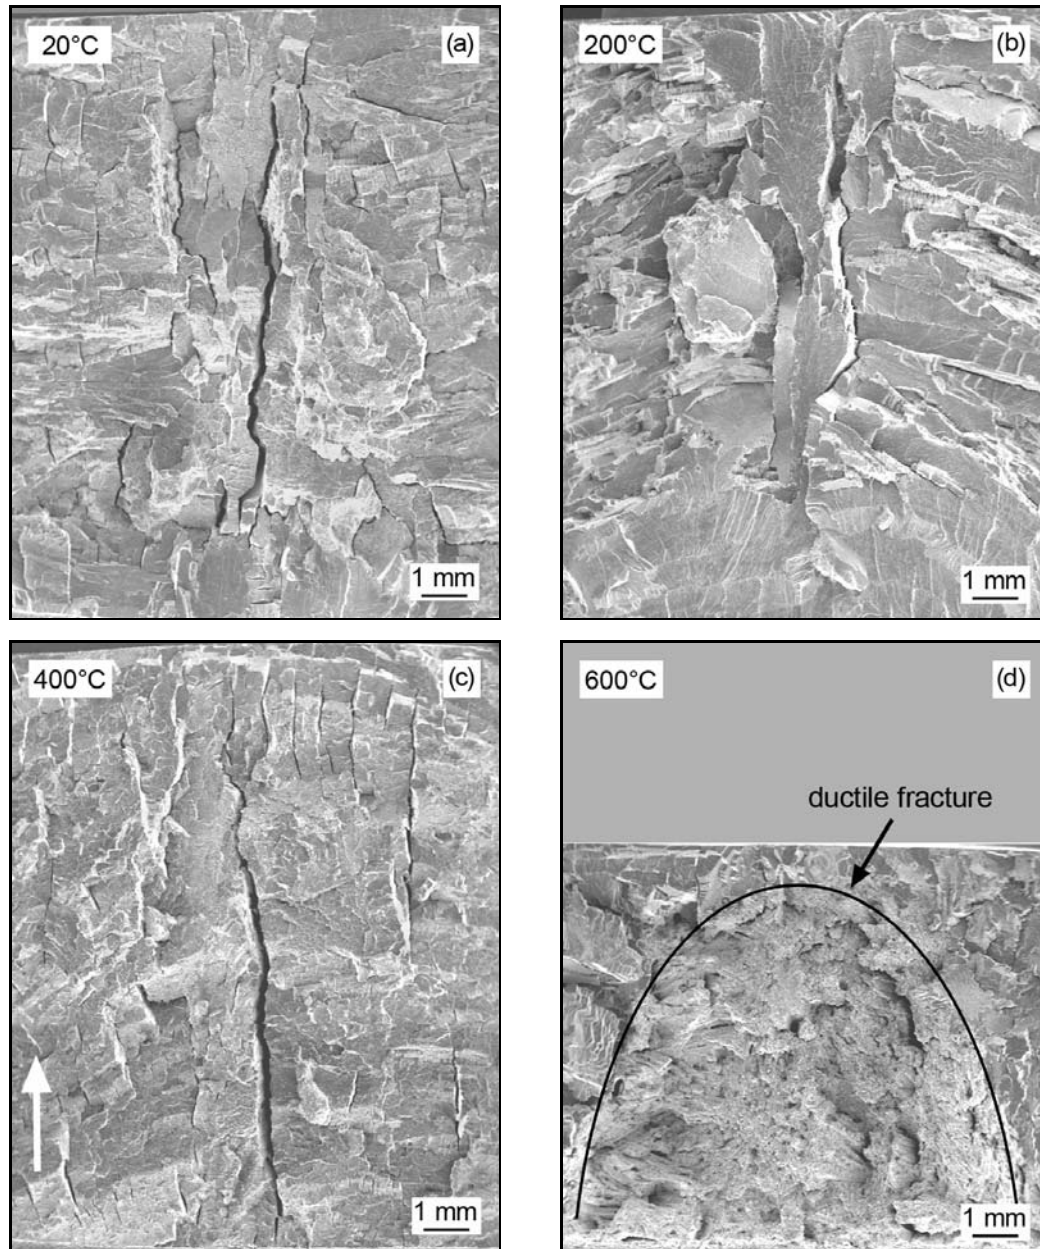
General view of fracture surfaces of CT specimens from FA06Z alloy quasistatically tested at 20°C (a), 200°C (b), 400°C (c), and 600°C (d). The arrow in Fig. 5c shows direction of crack propagation.
